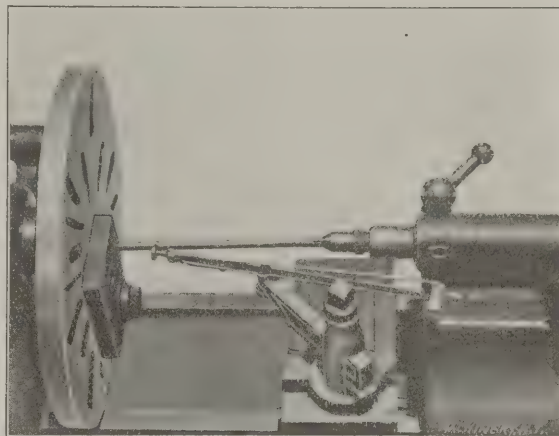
The "Just It" Lathe Test Indicator Centering a Prick-punch Mark.
